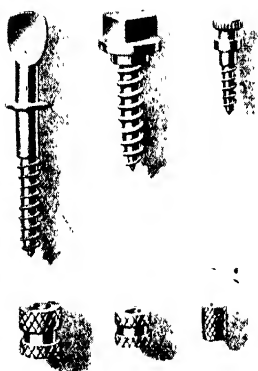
(top).—TYPES OF SCREWS FOR MOULDING-IN; (bottom) TAPPED INSERTS FOR MOULDING-IN
